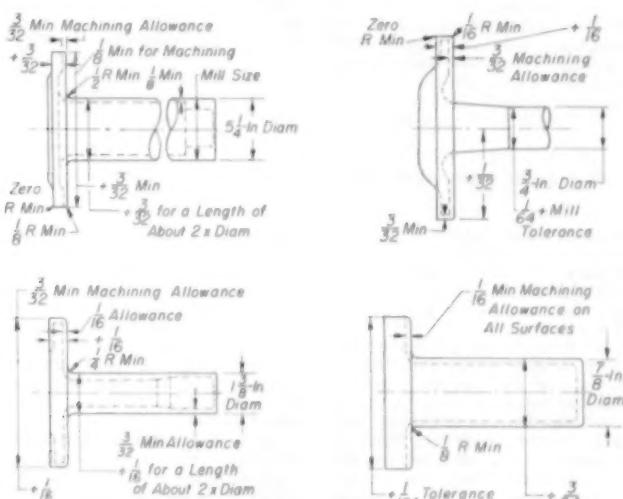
Tolerances (Shown with + or - Sign), Allowances and Design Rules for Upset Forgings
